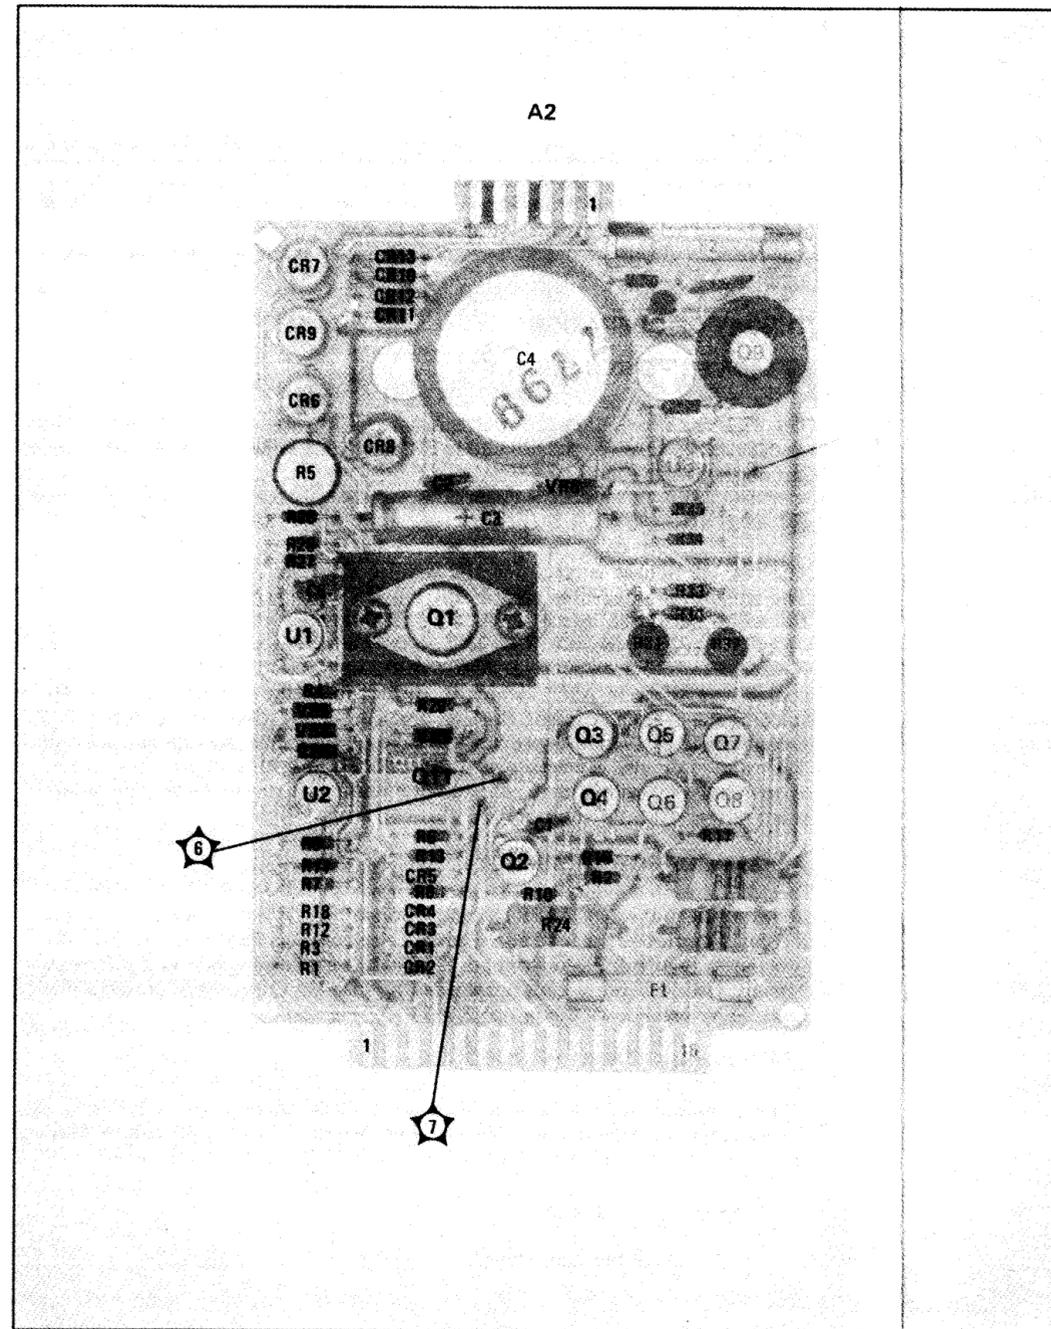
A2 Power Supply and Filter Switching Assembly
